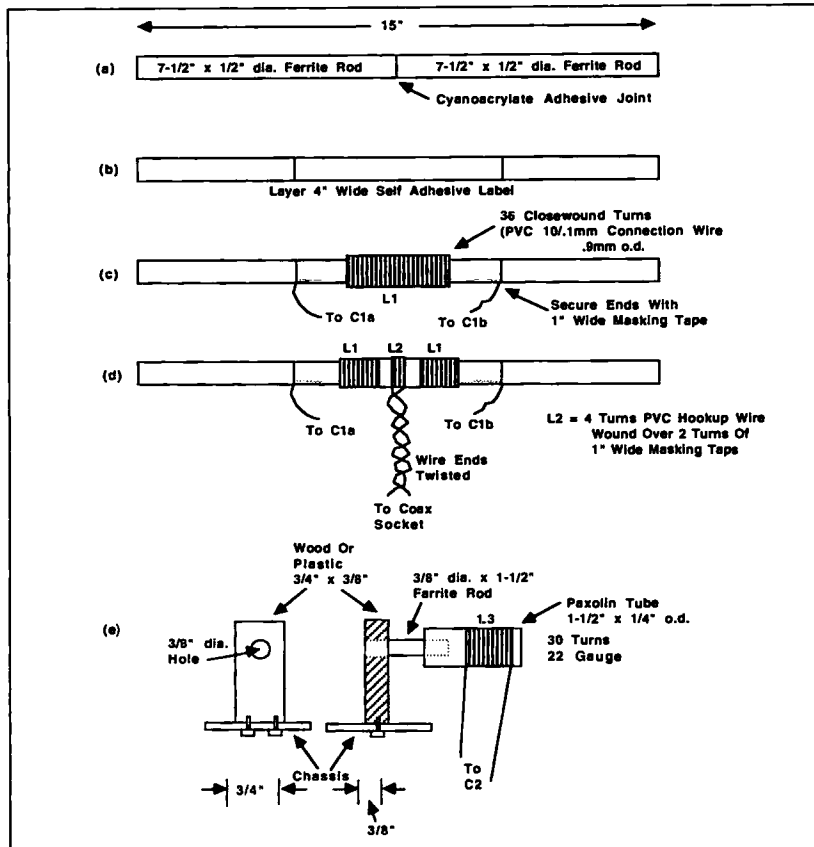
A, B, C, D: Ferrite L1 and L2 assembly; E: coil assembly.
